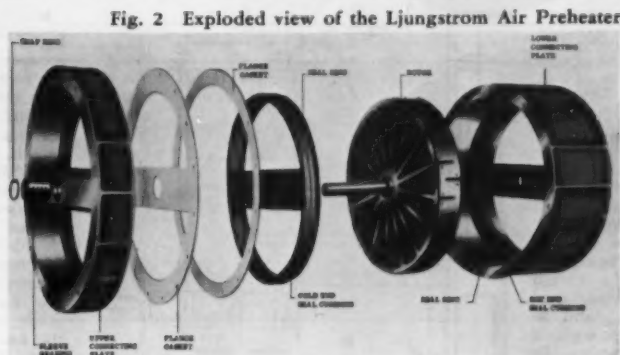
Exploded view of the Ljungstrom Air Preheater
